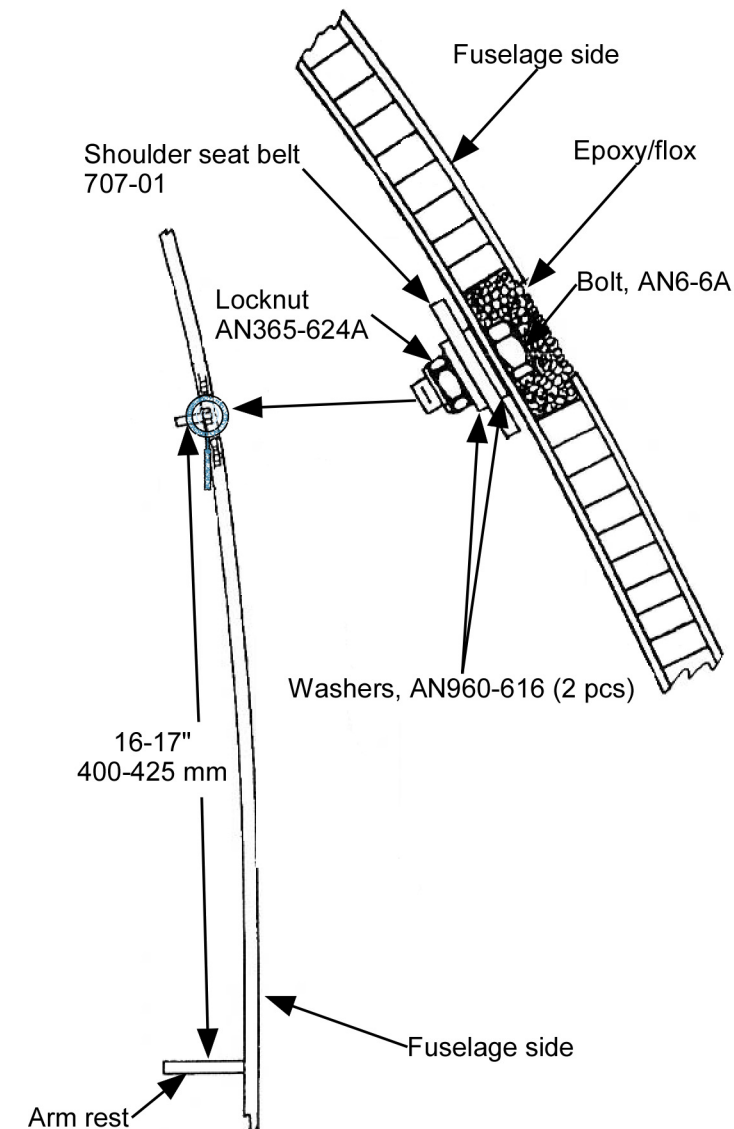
L.4 Shoulder belt attachment for the front seats
